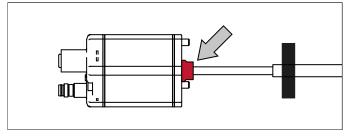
Remove sealing before inserting into sensor rod HD/HL/HP
